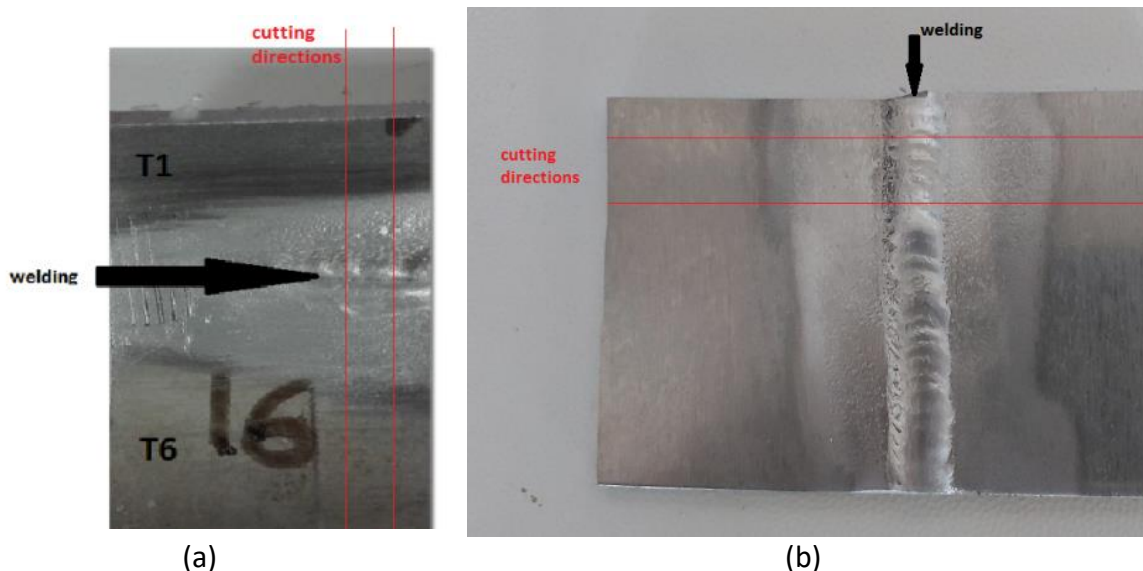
Cutting directions of a) 7005 T1-T6 MIG welding b) 7020 MIG welded plate.
